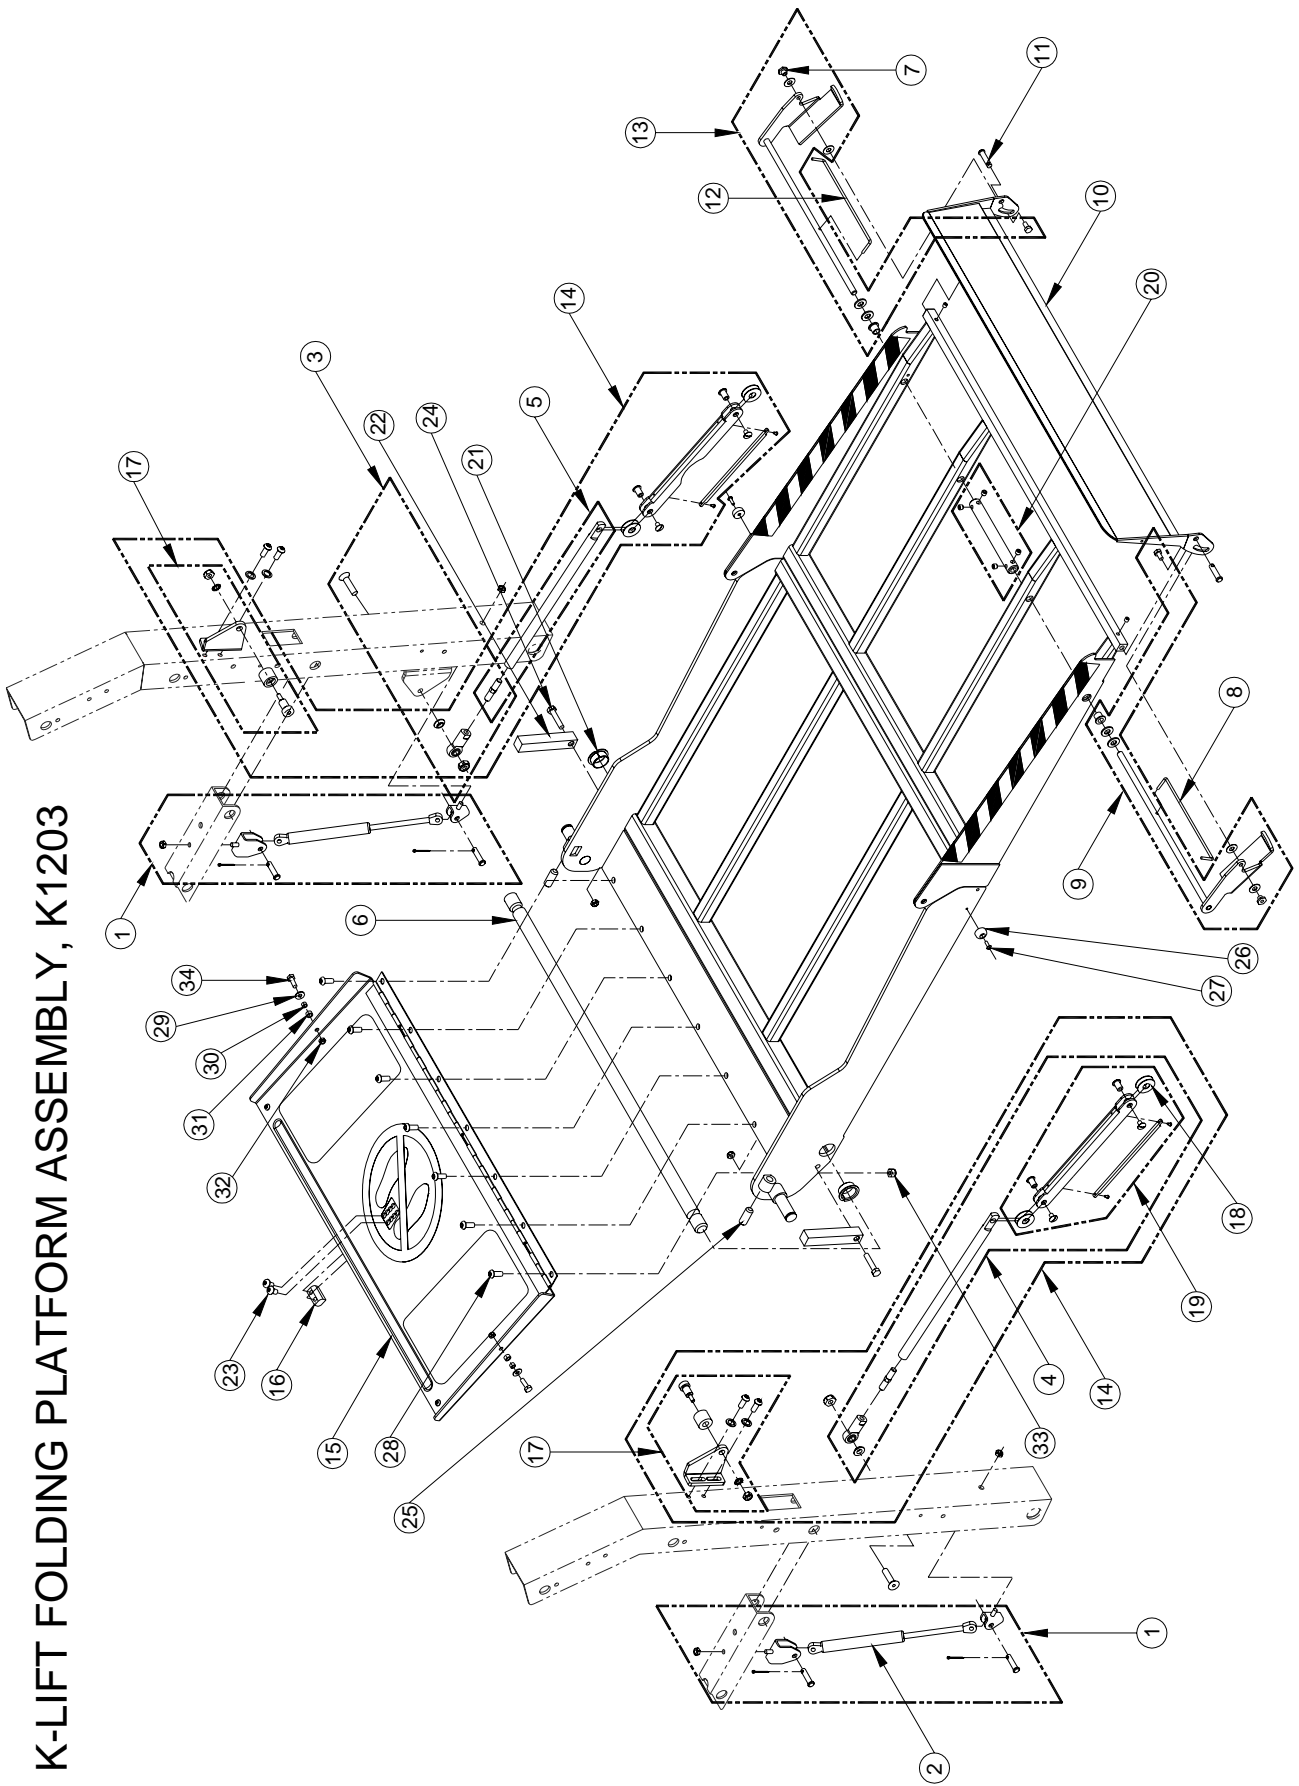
FOLDING PLATFORM ASSEMBLY, K1203
